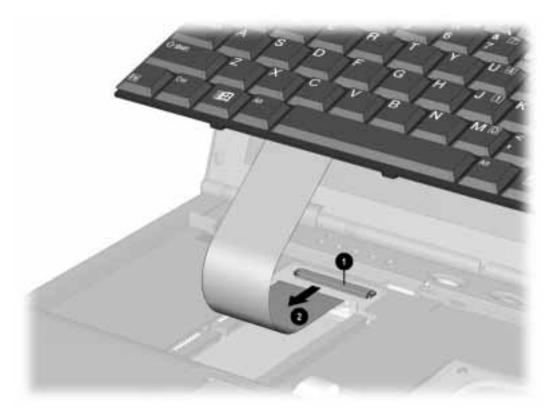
Disconnecting the Keyboard Cable Reverse the above procedure to install the keyboard.
